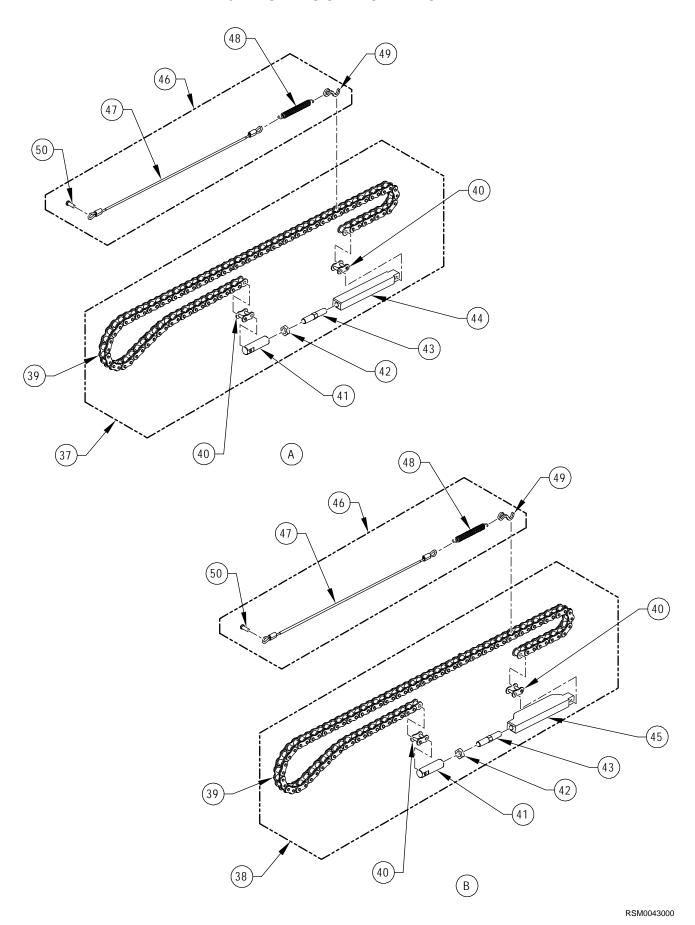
621R-SERIES RAMP ASSEMBLY (SHEET 2 OF 2)
